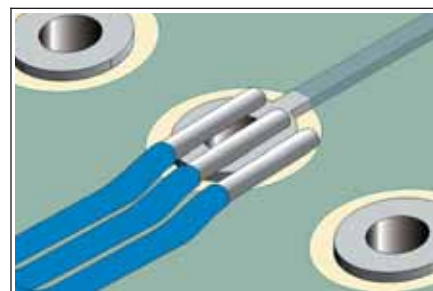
Not Recommended Multiple wires soldered to pad overhanging pad edge.
